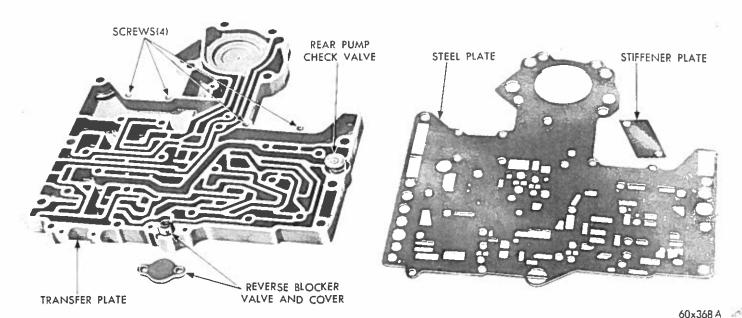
Transfer and Steel Separator Plate Assembly (Disassembled View)
